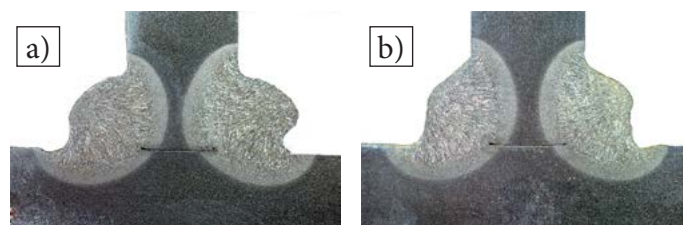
Cross-section of the test joints: a) specimen W01 – left: weld NM01, right: weld M01; b) specimen W02 – left: weld NM02, right: weld M02; free from welding imperfections; etchant: Nital
